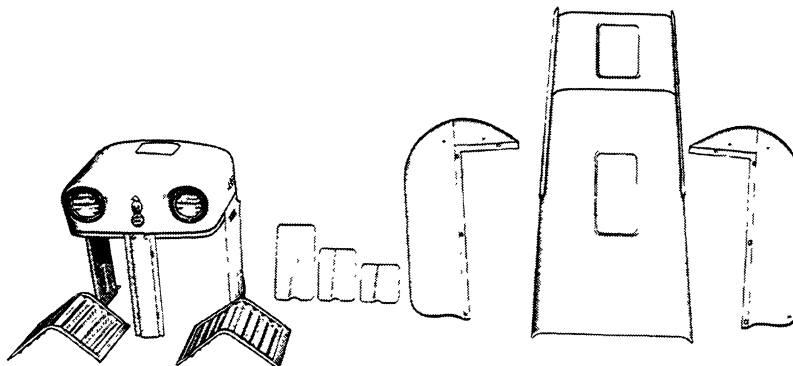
Sheet Metal Removed "500B" and "600B"
